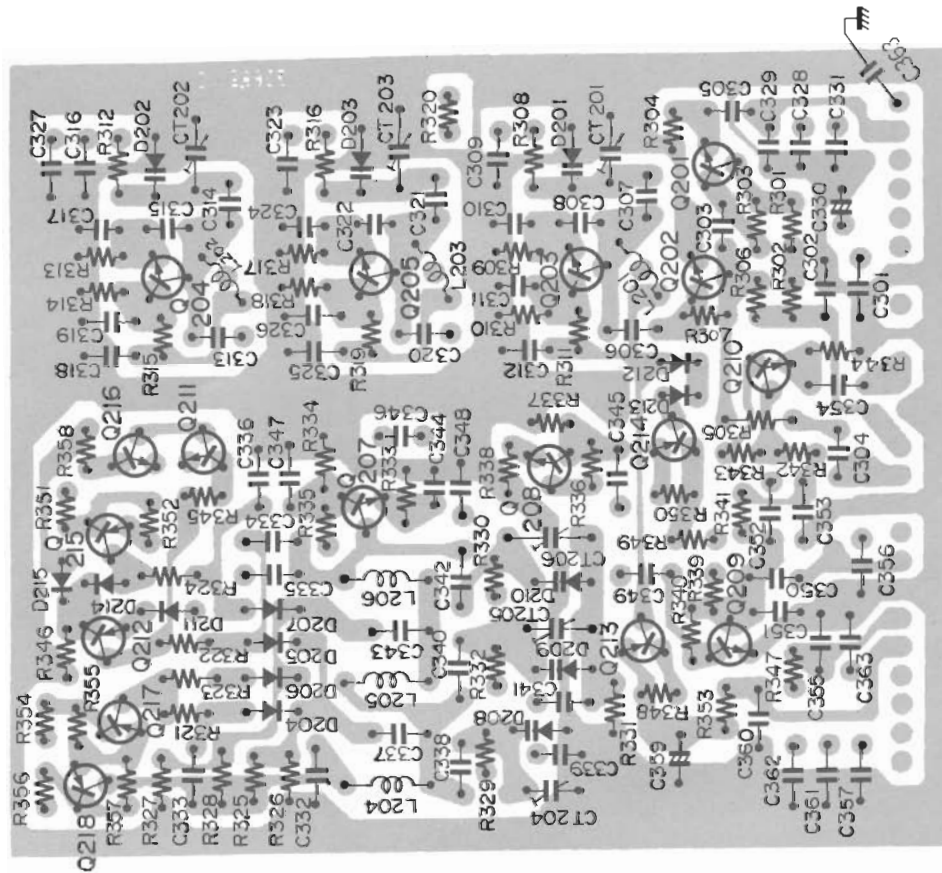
VCO P.C. BOARD, COMPONENT/WIRING SIDES
